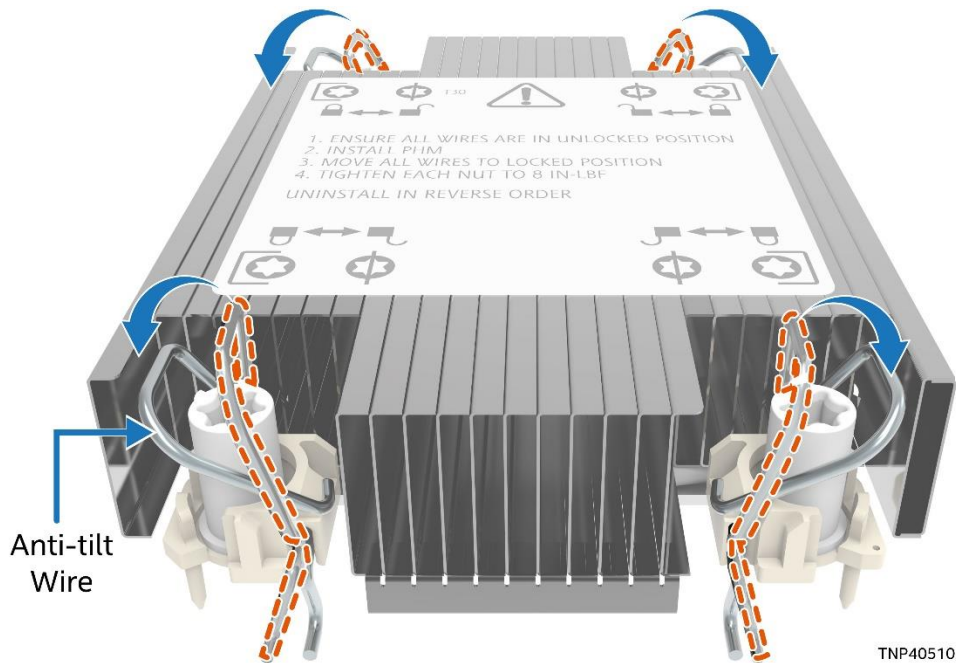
Processor Heat Sink Anti-tilt Wires in the Outward Position
